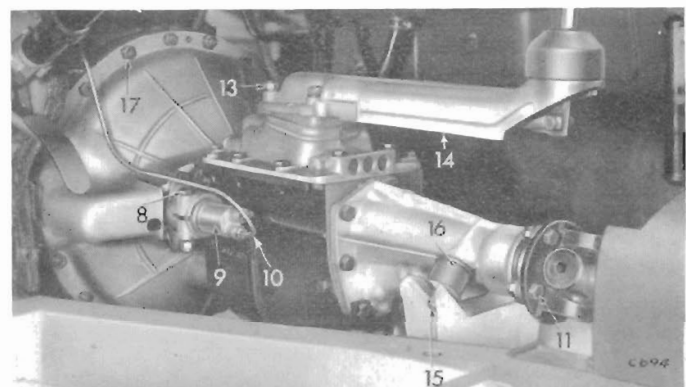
Herald 1200, 12/50 and Spitfire gearbox attachments
